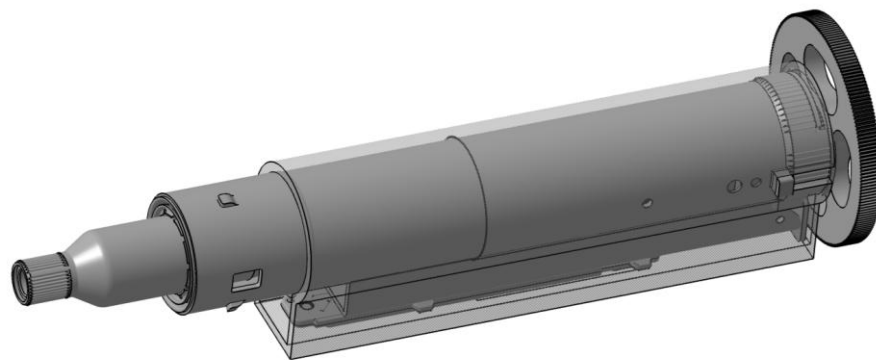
Shows the conceptual steering column in a fully collapsed state.
